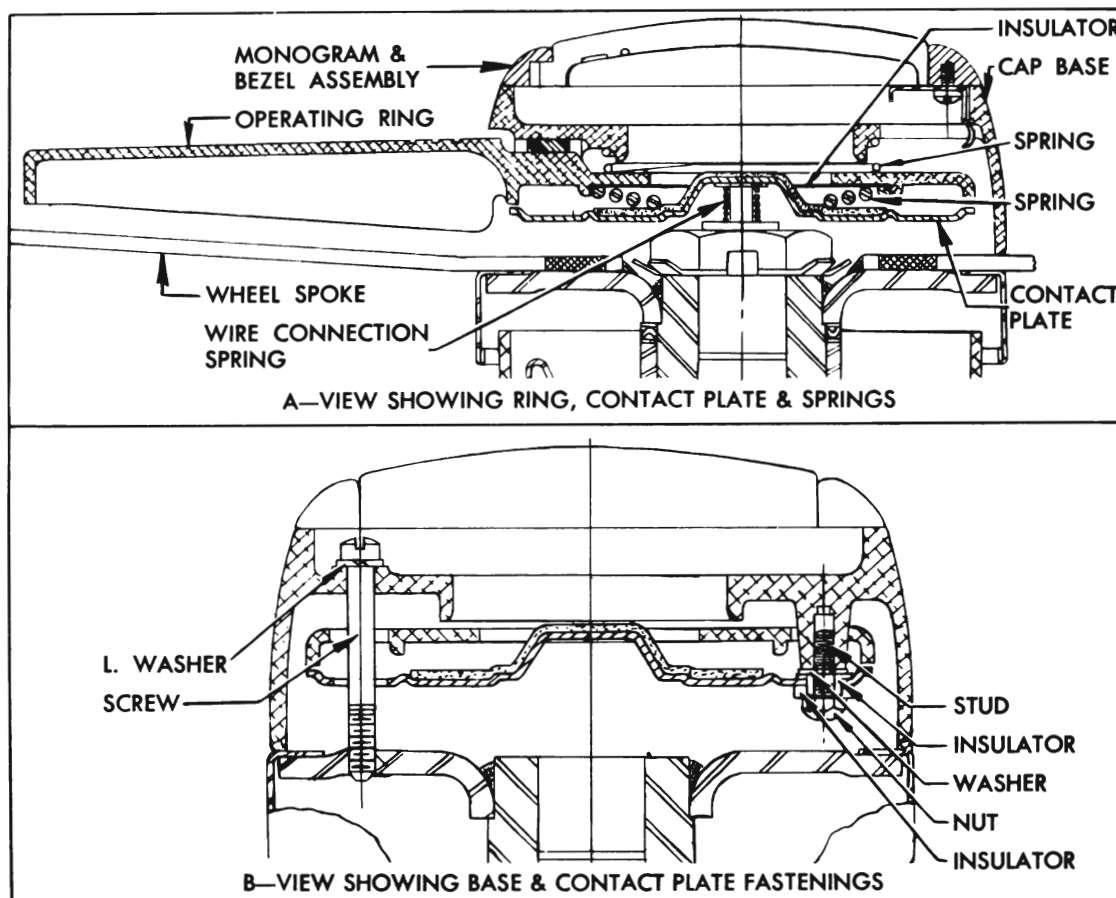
Horn Button in Flexible Spoke Steering Wheel—
